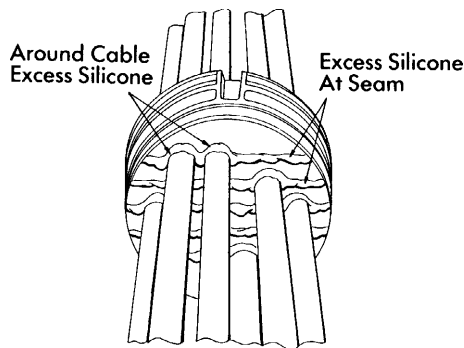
COMPLETED APPLICATION OF TIP CABLES
